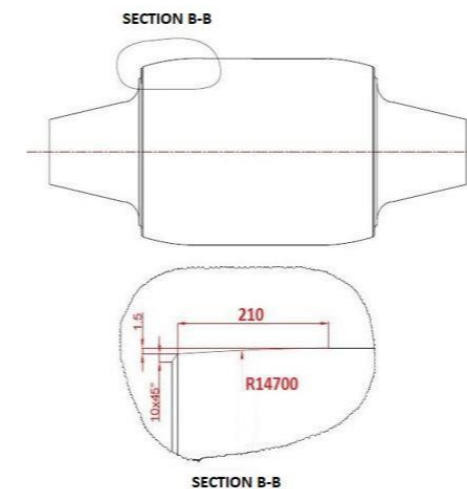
The new chamfer design, which is being used in ISDEMIR HSM.
